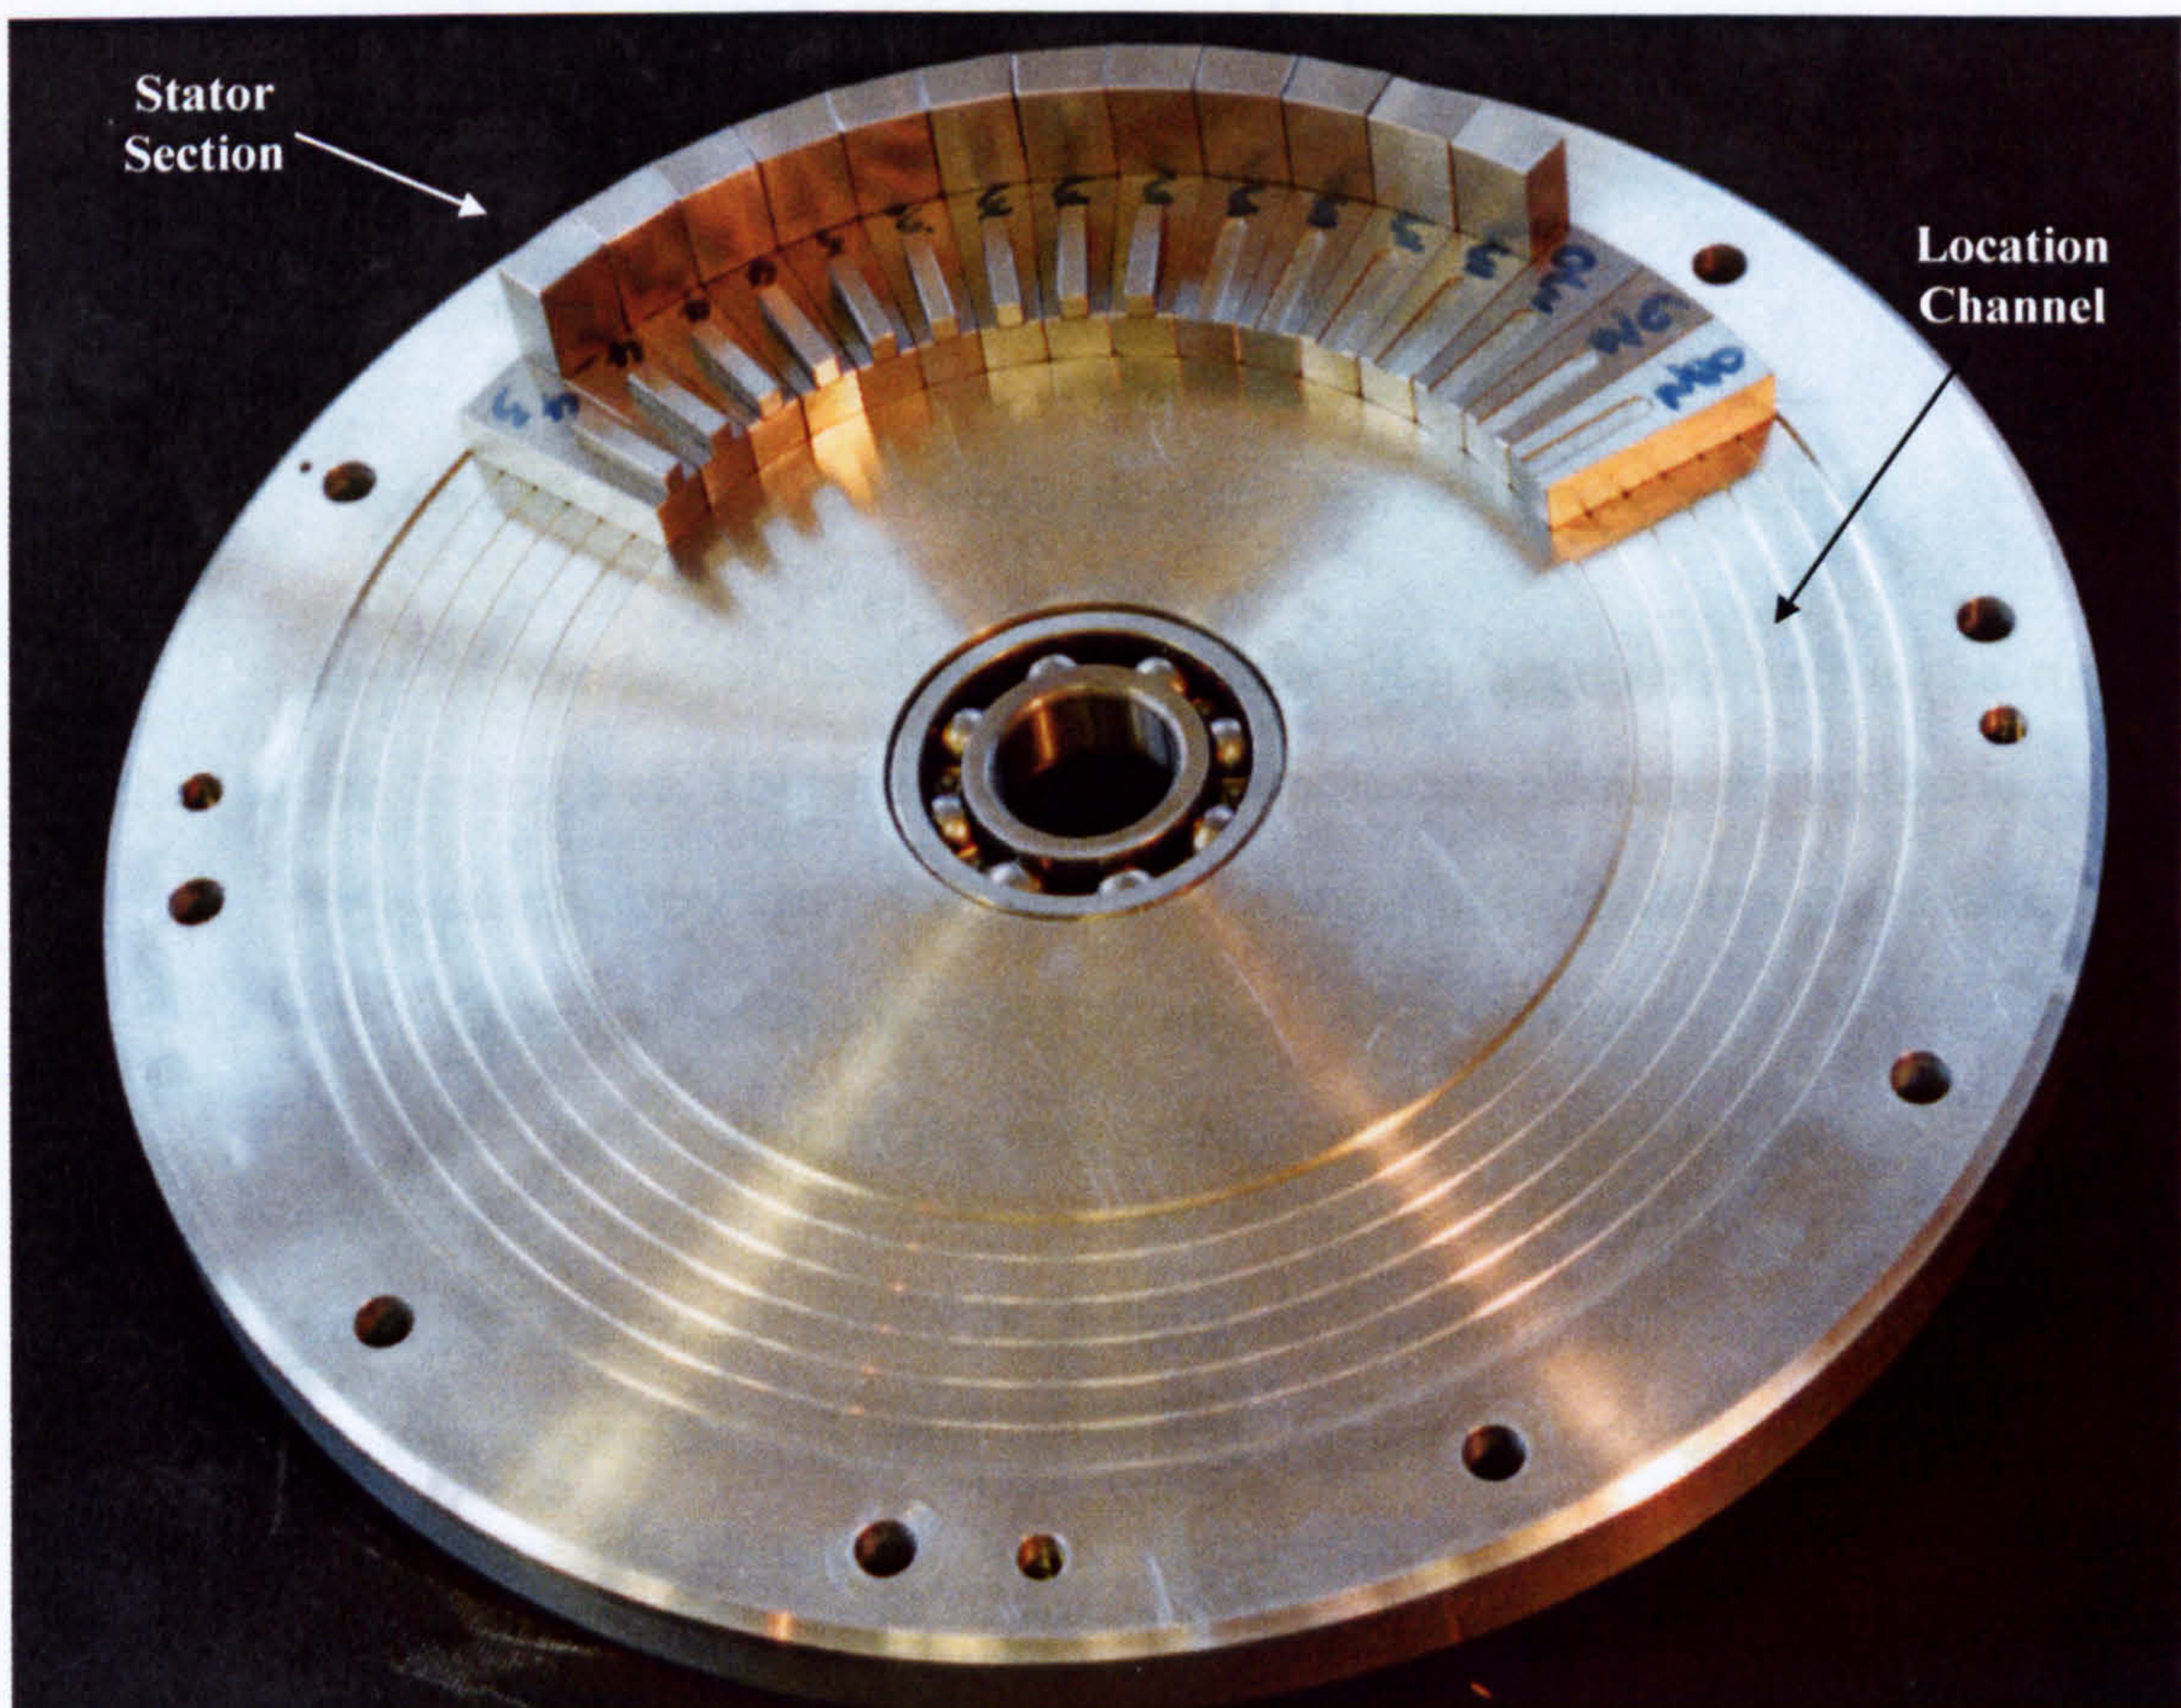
Component SMC pieces arranged on one of the aluminium mounting plates
